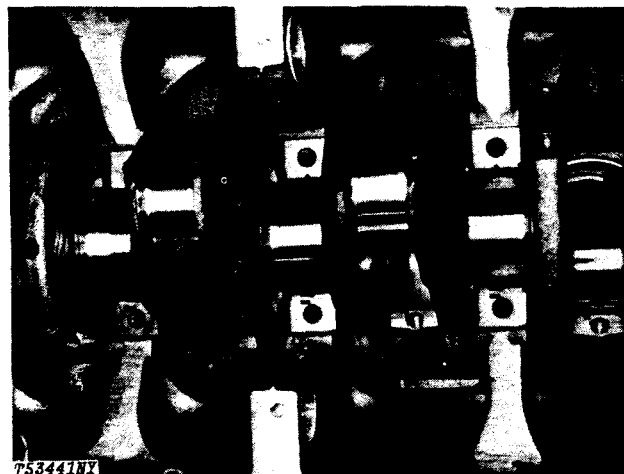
Connecting Rod and Main Bearing Caps Removal
